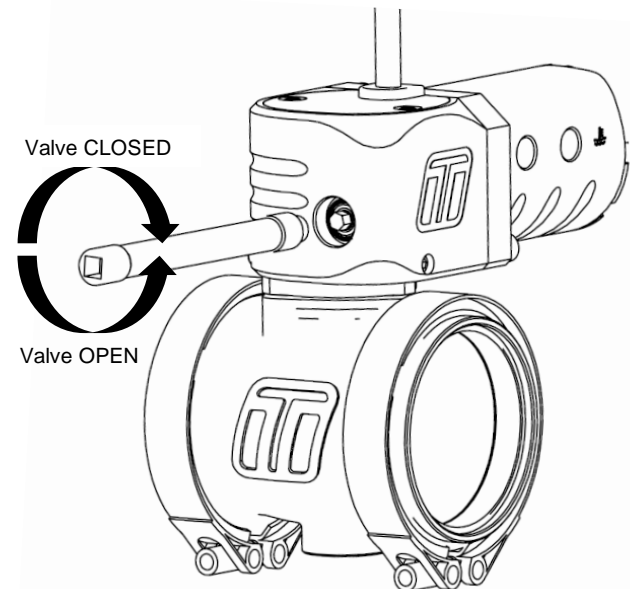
¼ Drive extension with 5mm socket manually adjusting.
